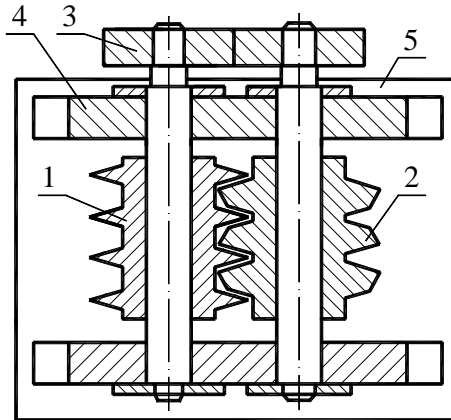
Roller device for grinding polymer film: 1 – drum with cutting teeth; 2 – toothed drum with a beveled cutting edge; 3 – gear transmission; 4 – racks; 5 – casing [23]
